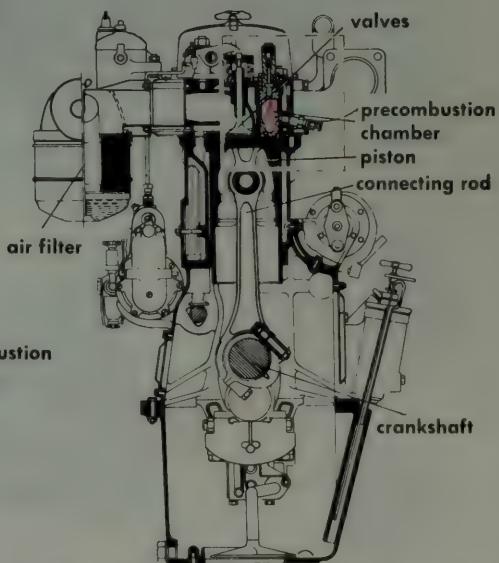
DIESEL ENGINE WITH PRECOMBUSTION CHAMBER
